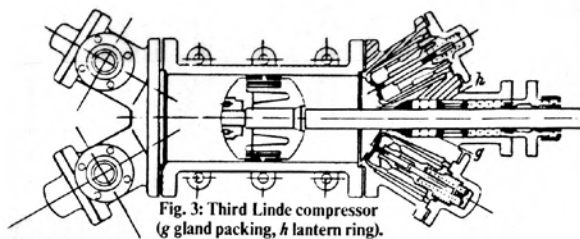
Third Linde compressor (g gland packing, h lantern ring).
